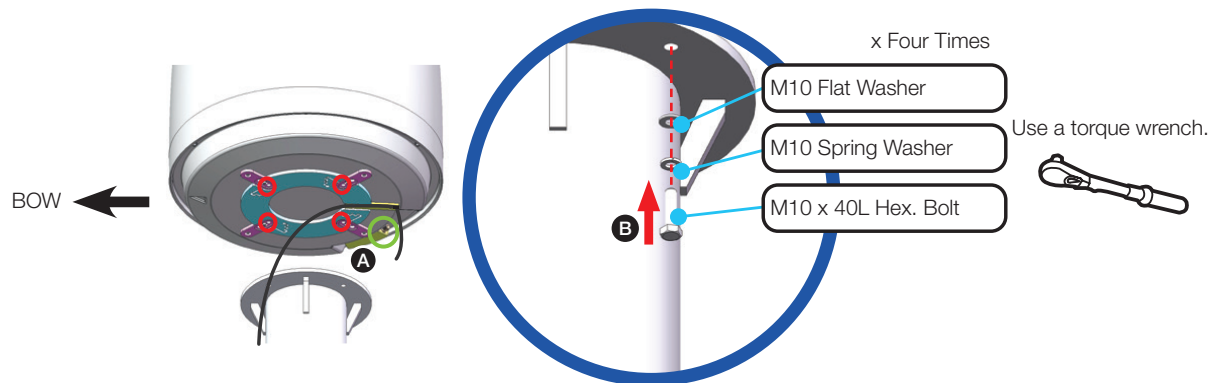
Mounting Antenna using Inner Holes (with M10 Bolts)
